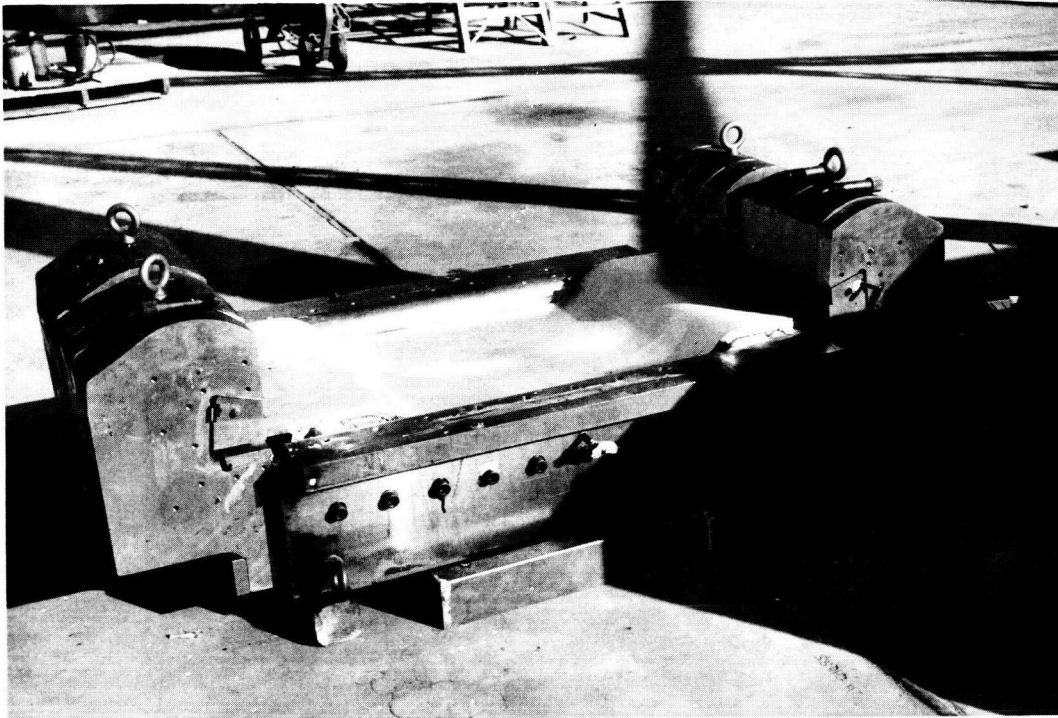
Sub-Scale Die Showing .89 Inch Thick 2219-T37 Plate After Explosive Forming
